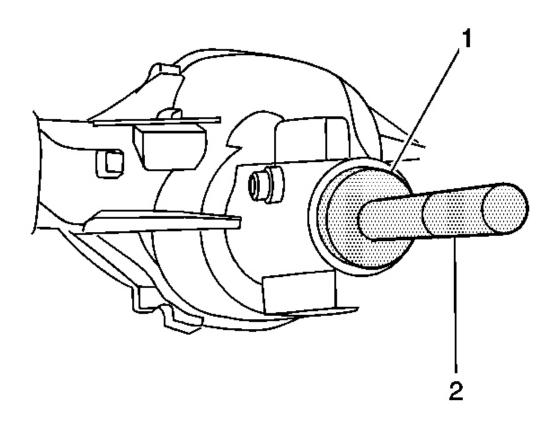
Install The Outer Pinion Bearing Cup Using J 8611-01, J 7818 Or J 8608 & J 8092
